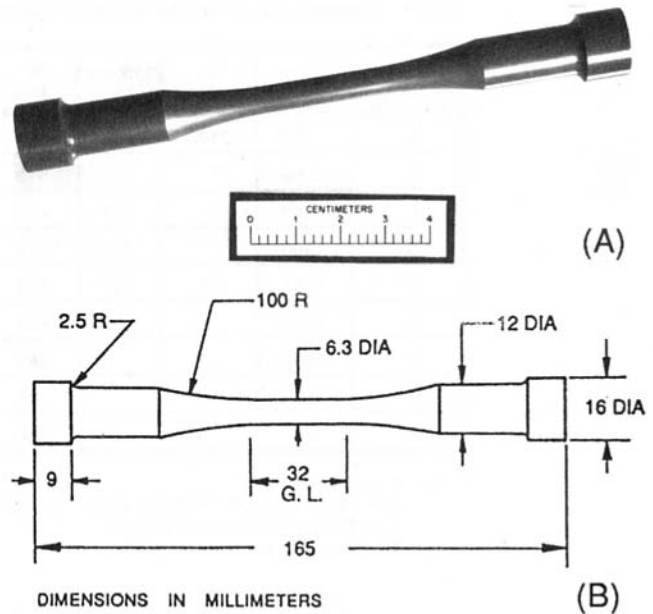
(A) A buttonhead tensile specimen and (B) specimen geometry
